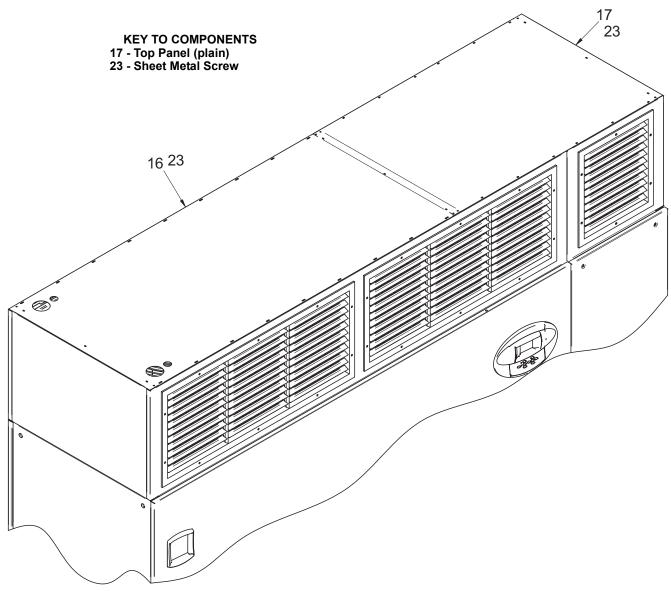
Grilled plenum front / rear-discharge top panel attachment
